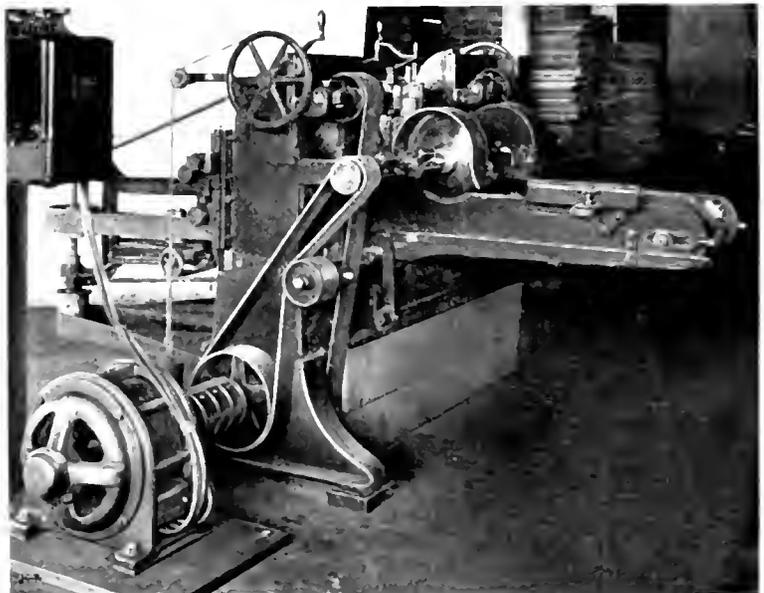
10 H P. Induction Motor Driving Double End Tenoning Machine
